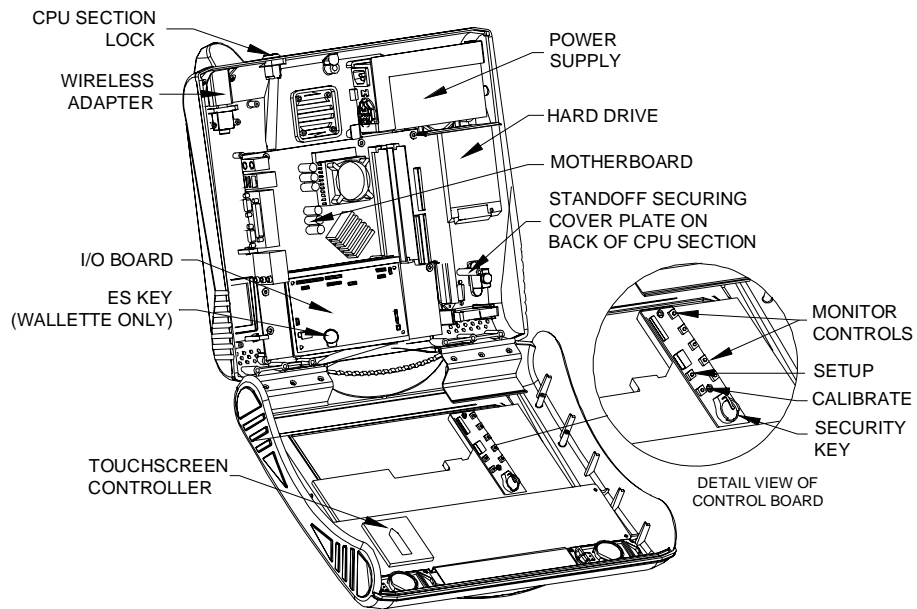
WALLETTE / ENTERTAINER WITH CPU SECTION OPEN
